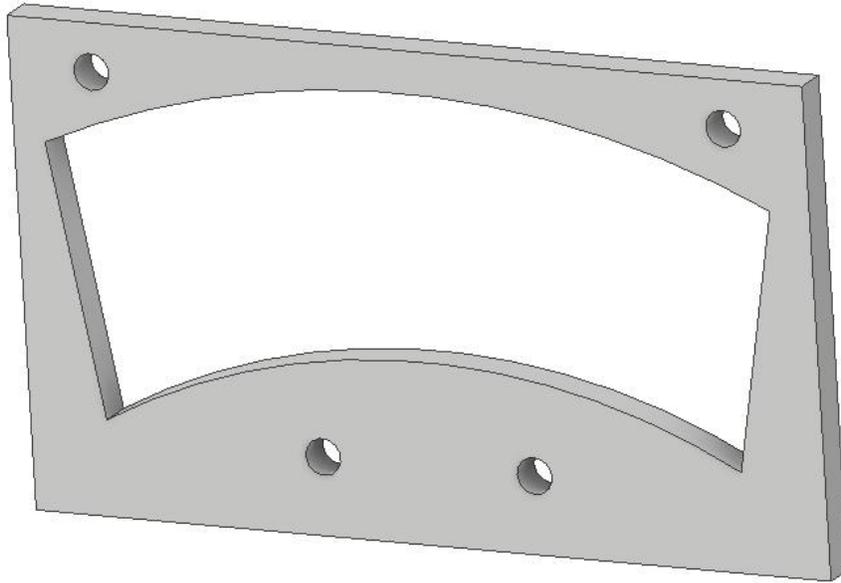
3D CAD Model of Stabilizing Fixture.
